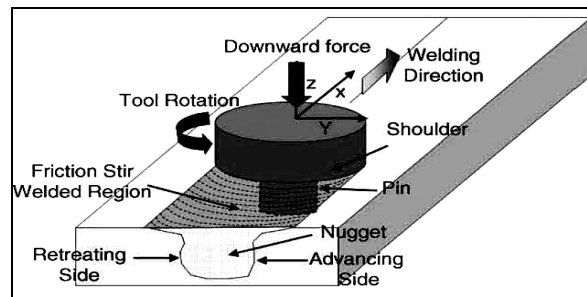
Friction stir welding process by using a rotating tool which moves in the direction of joined edges of plates adopted from [1]
